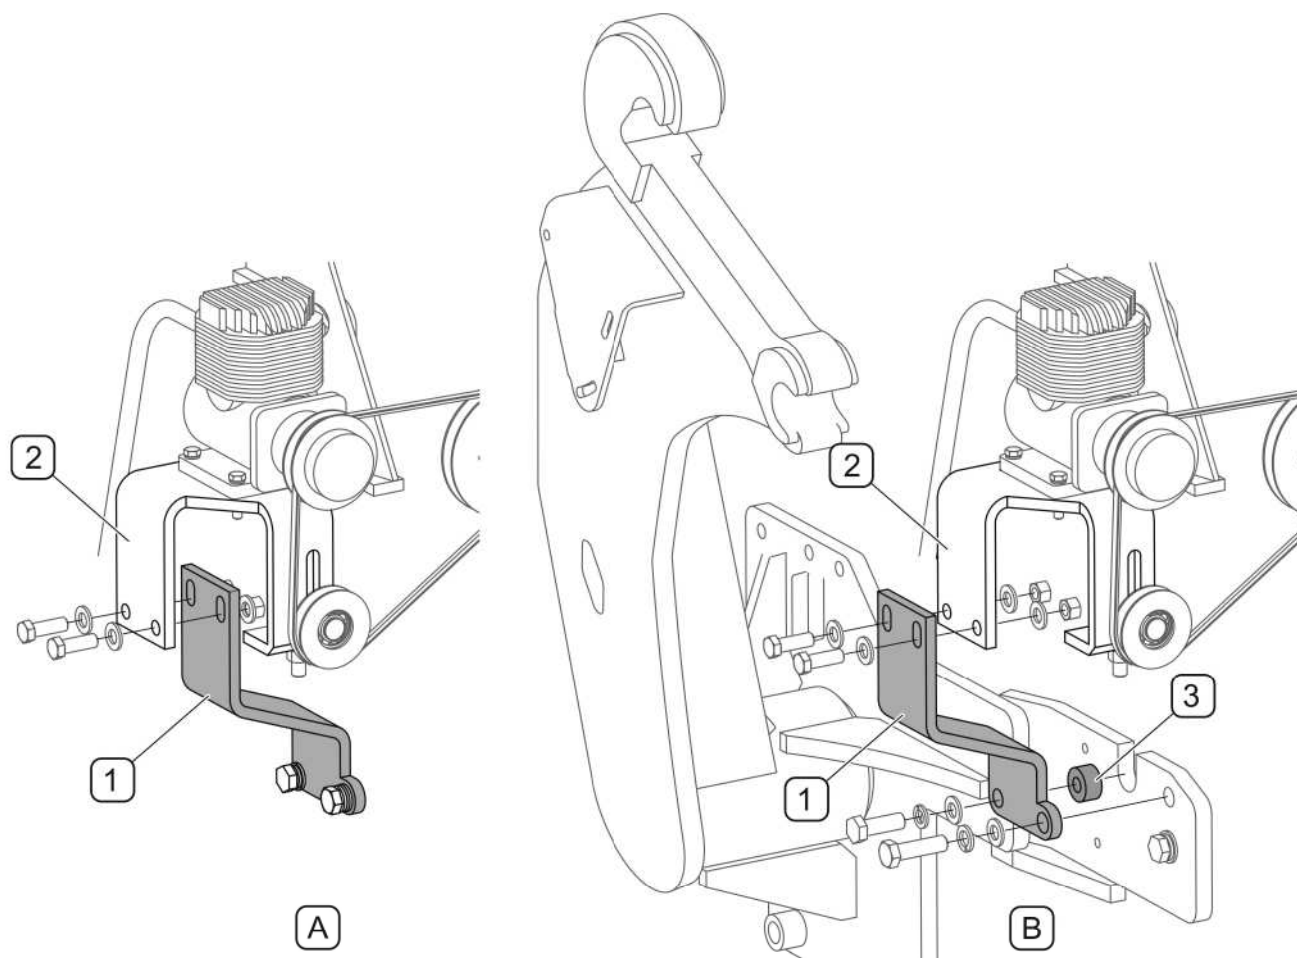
A Changing the compressor mounting bracket in Kioti DK451C tractors
